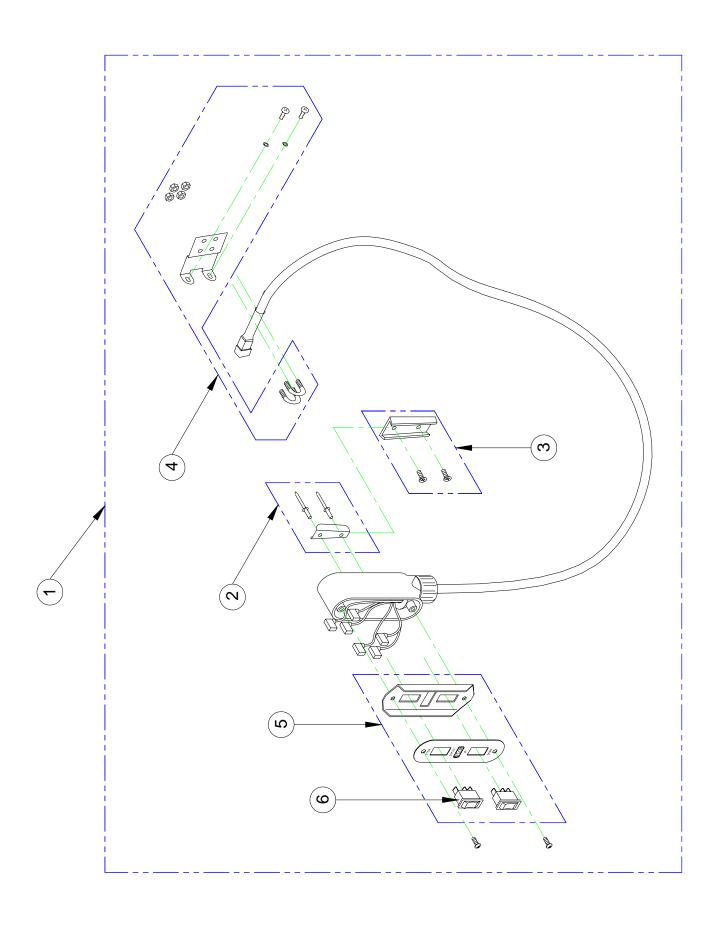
CONTROL PENDANT ASSEMBLY
